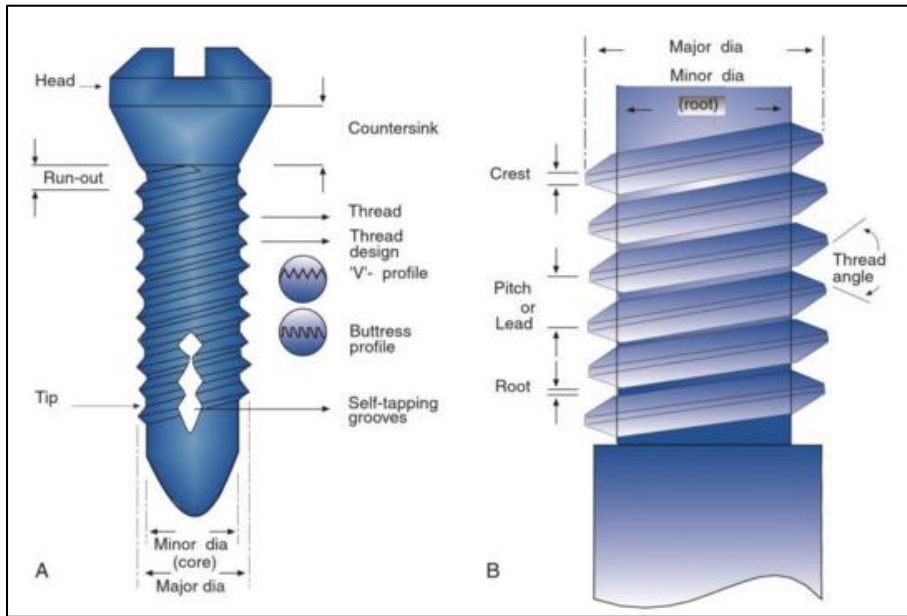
Representation of the bone screw details (left), and thread details (right) [62].
